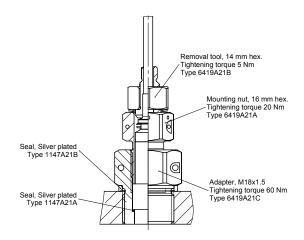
Sensor installation with adapter Type 6419A21C and removal tool Type 6419A21B for Sensor with Lemo connector or open leads $\frac{1}{2}$
